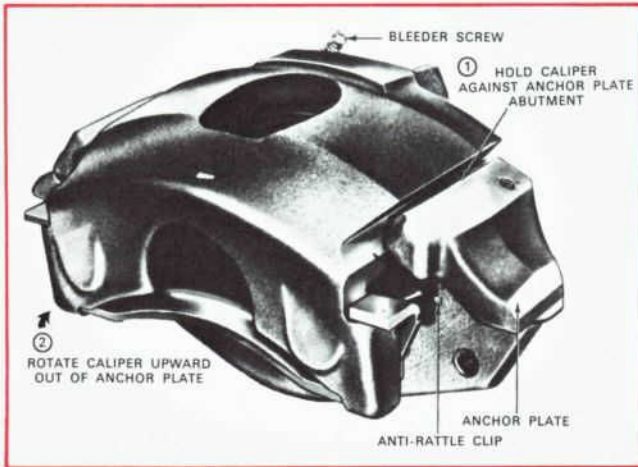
Follow these steps in the order shown to remove the sliding caliper from the rotor.
